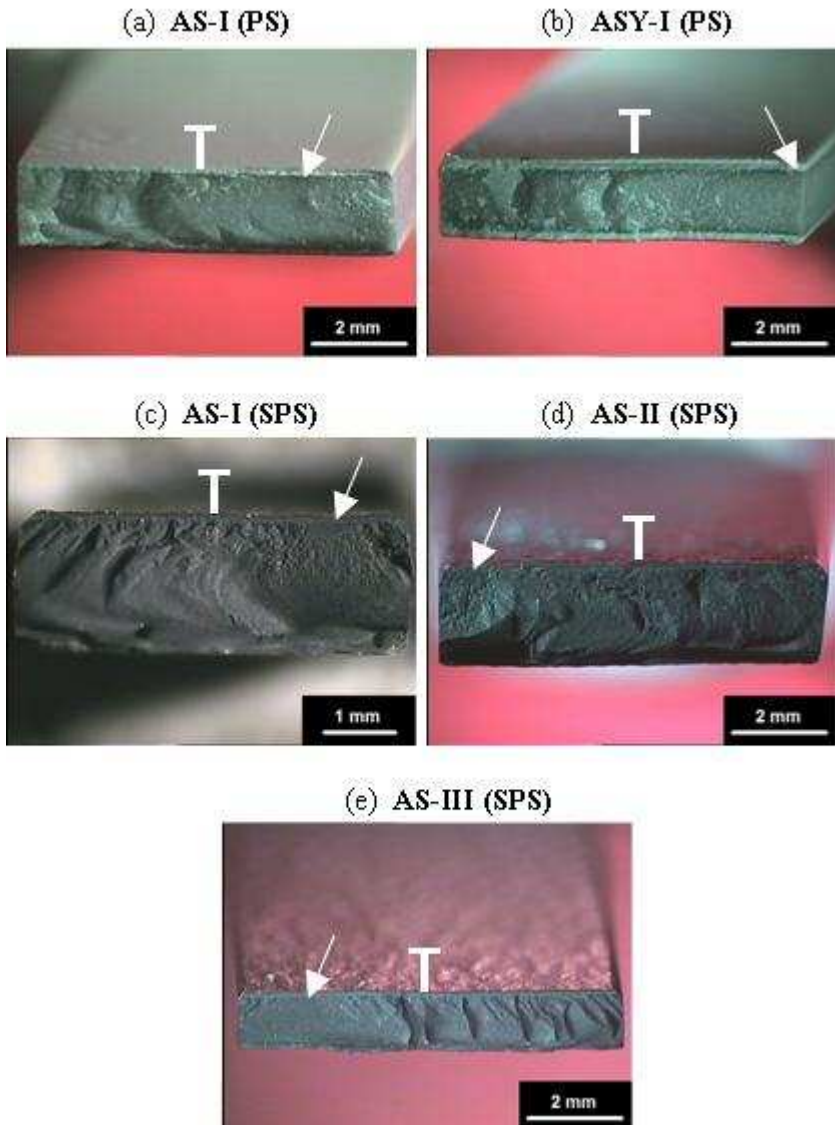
Fracture surfaces of engineered laminates samples. A smooth narrow region with a through thickness geometry is present just beneath the tensile surface (indicated by T). Reinitiating crack fracture mirror is indicated by arrow.
